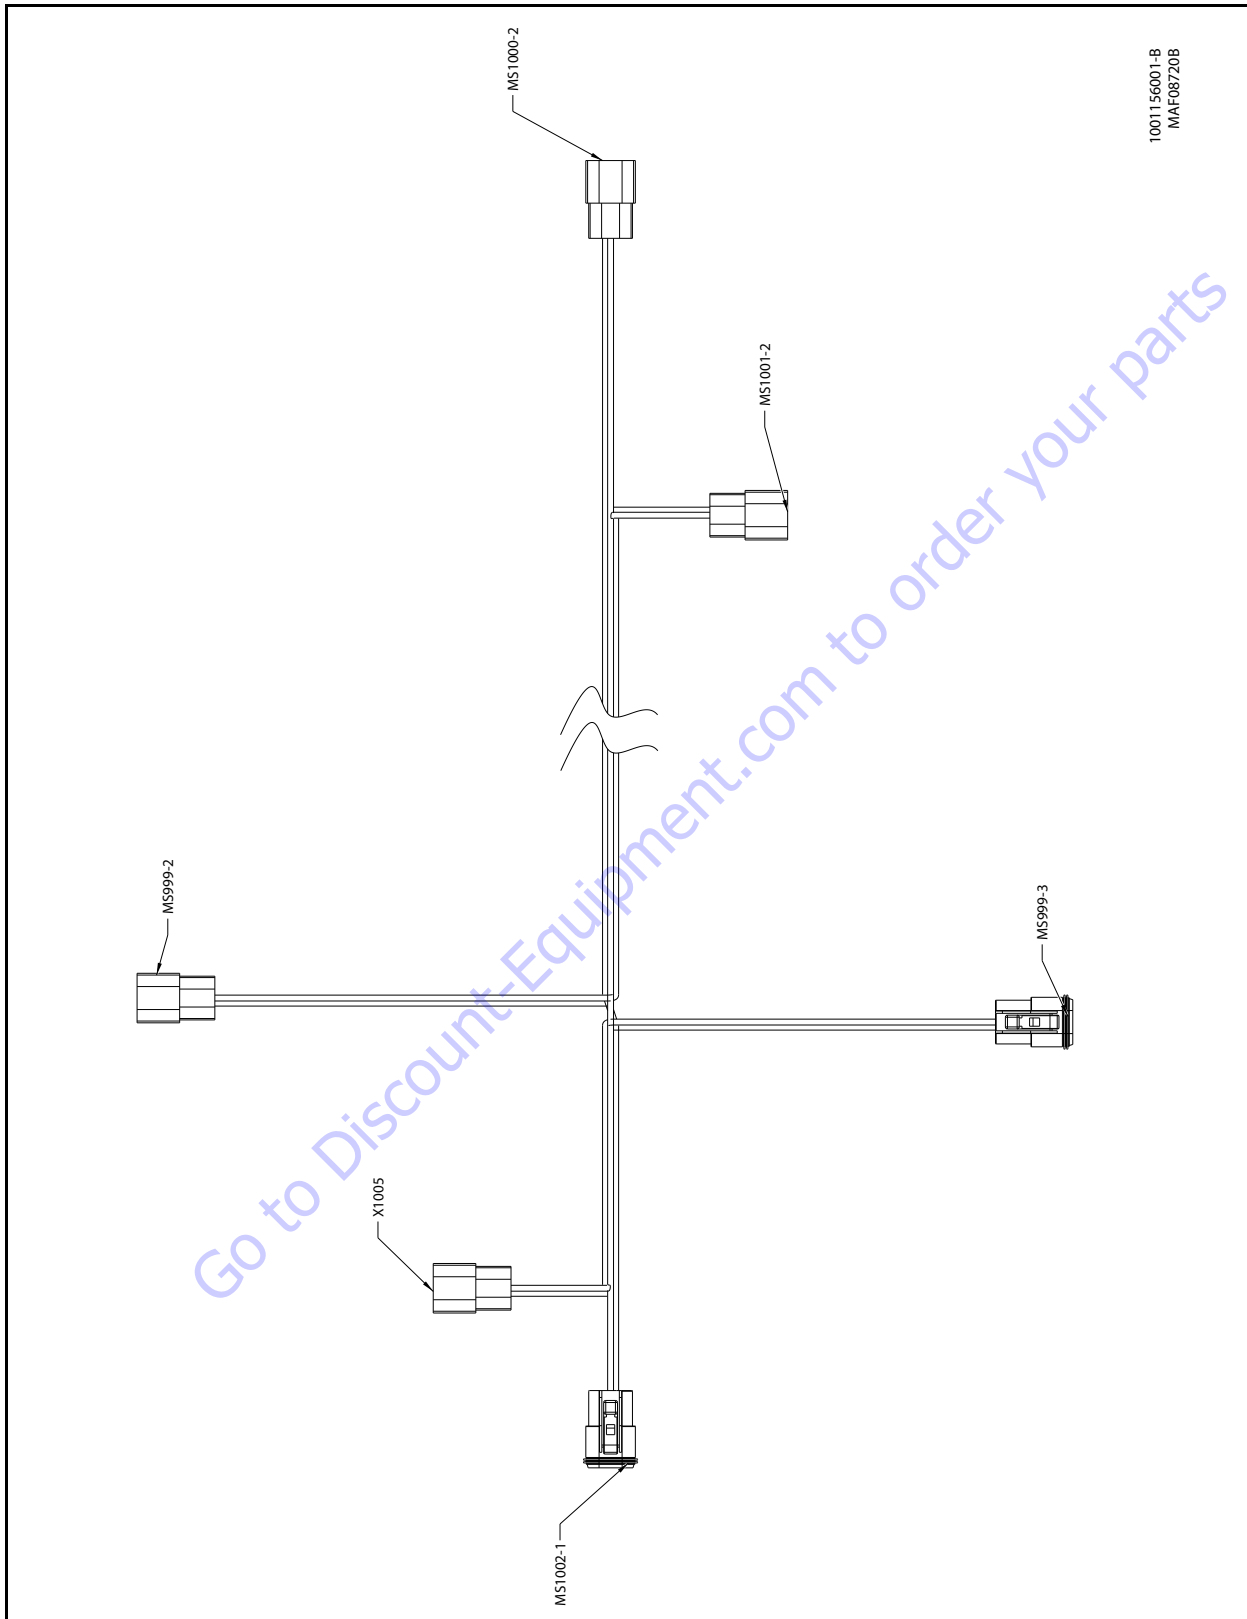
CAN Engine Harness - Sheet 1 of 2
